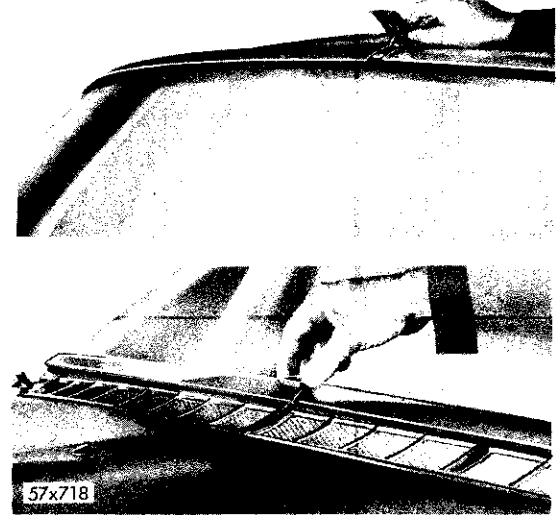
Removing or Installing Upper and Lower Moulding Clips (Imperial Models)
